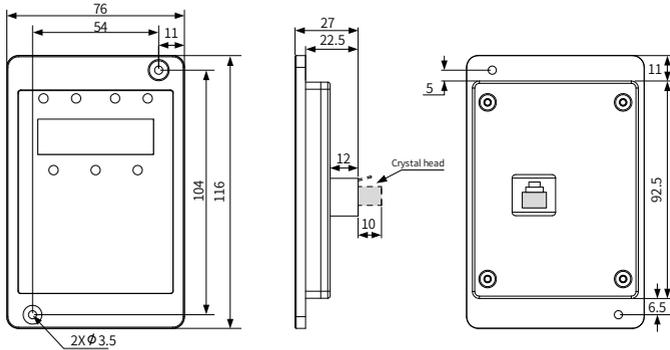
Mounting dimensions of MD32NKE1 (unit: mm)
